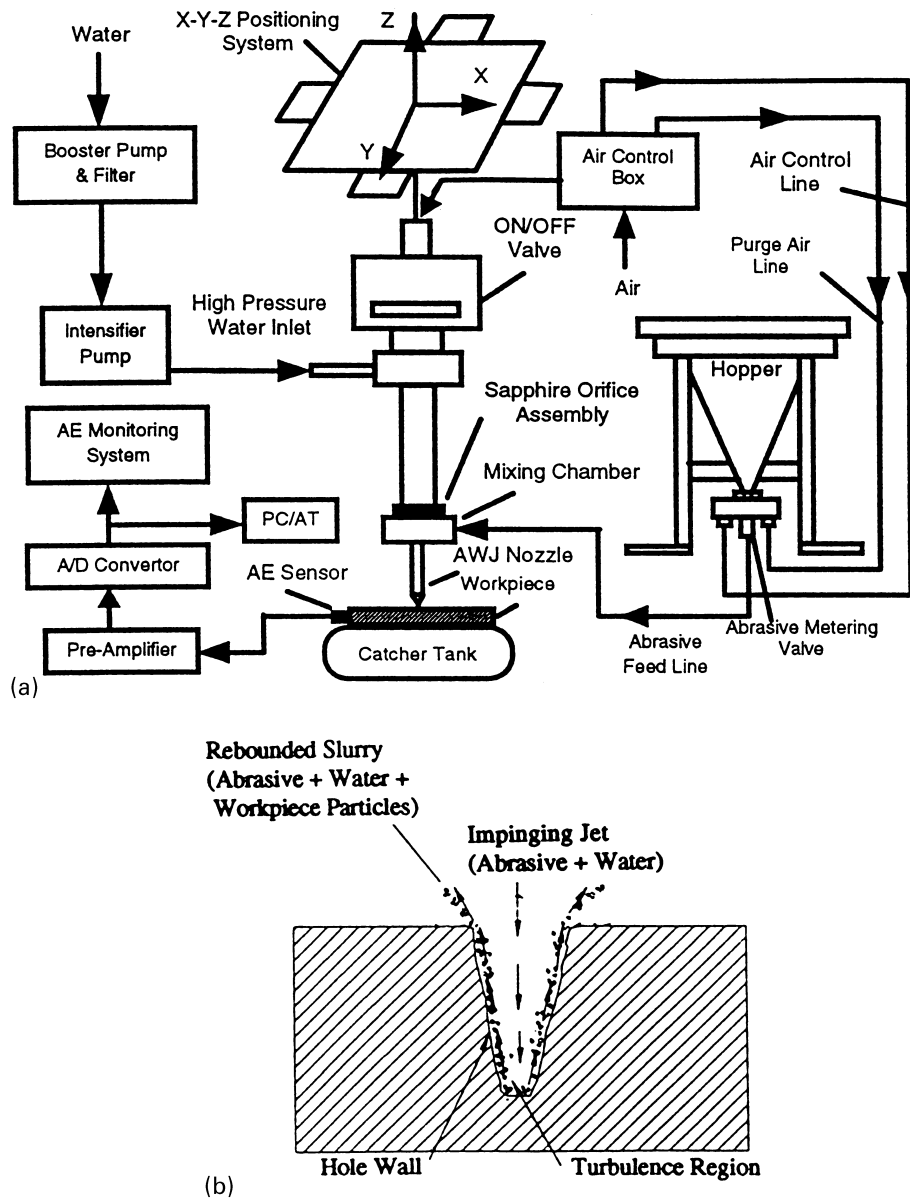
(a) Experimental set-up; (b) typical cross-section of a drilled hole
